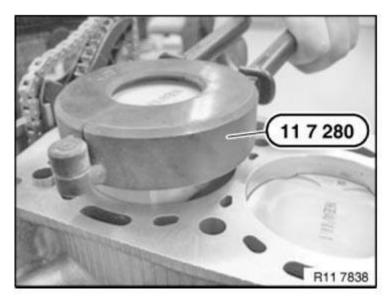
Compressing Piston Rods Using Special Tool 11 7 280 Courtesy of BMW OF NORTH AMERICA, INC.
